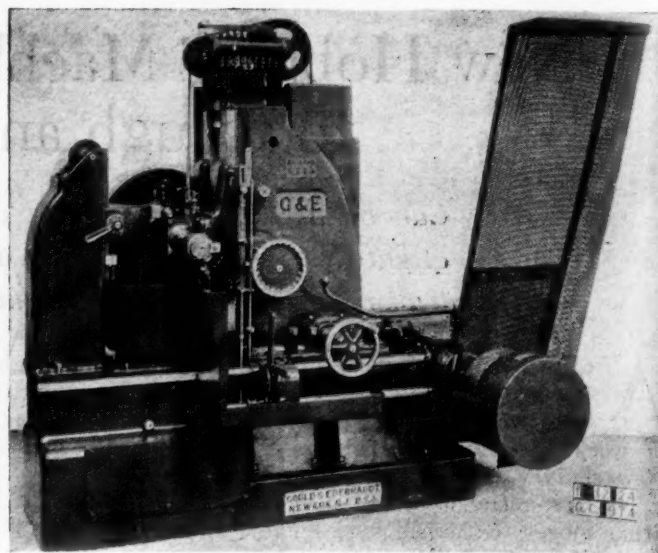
Gould & Eberhardt 16-HS gear hobbing machine
